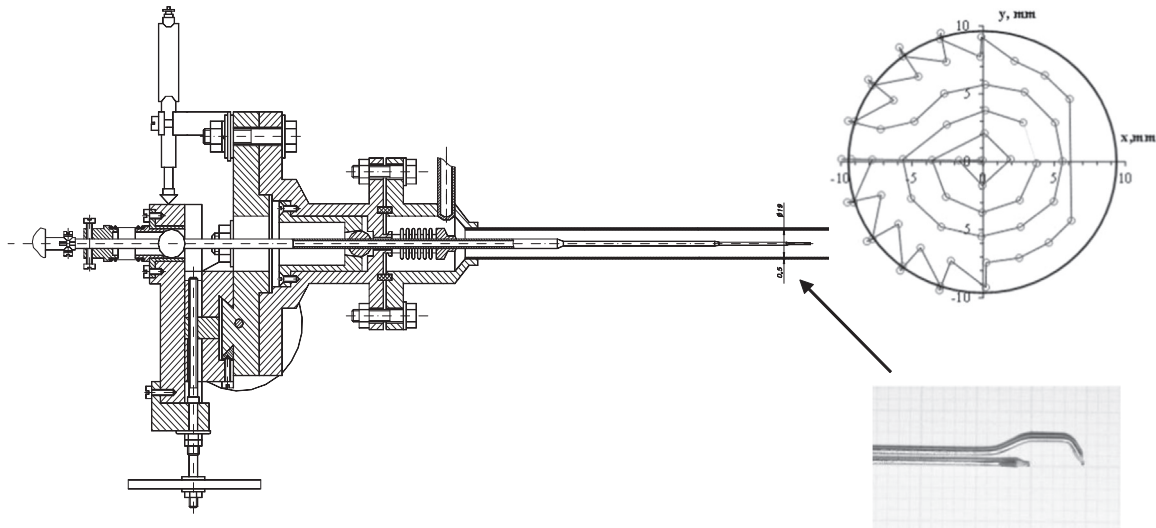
Swivel – type probe, TCV sensor, and typical measurement points mapped in the tube's cross-section.
